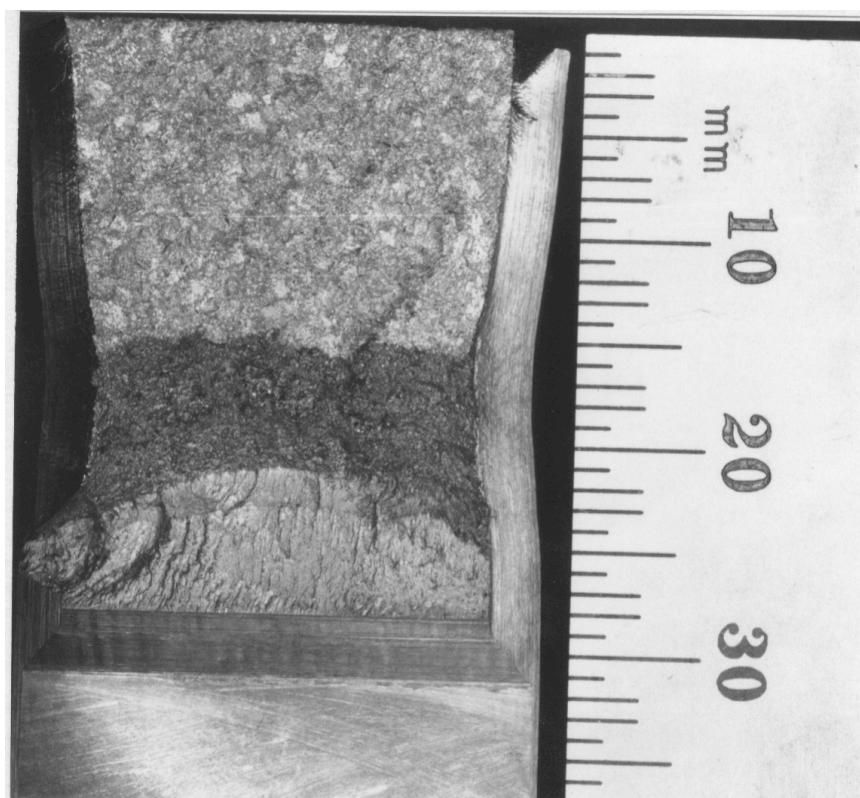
Fracture surface of MA9 material from cooler region of the hot-leg main shutoff valve aged 10,000 h at 400°C and tested at 290°C
